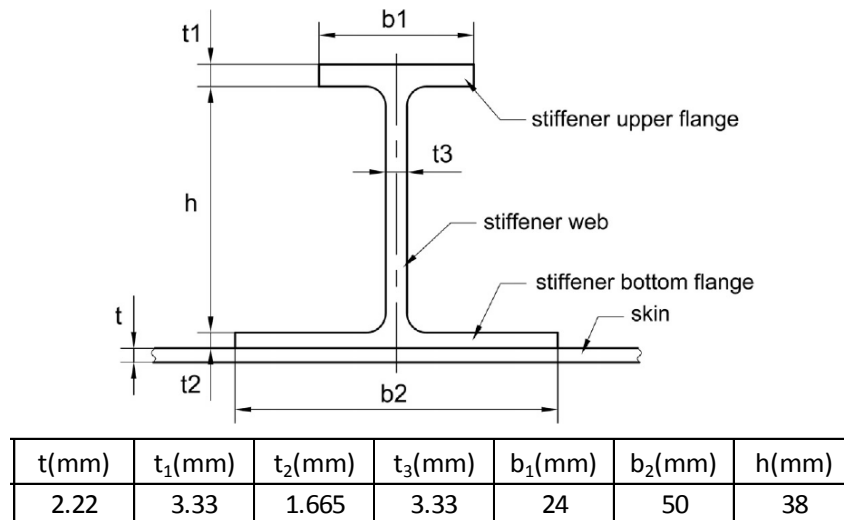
Cross-sectional view and dimensions of the stiffener [37]
